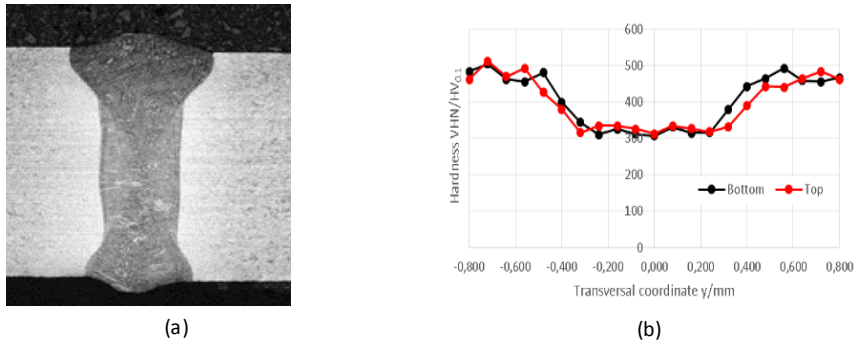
Similar square butt weld in 1.4678 (FORTA H1000): (a) Macro section and (b) hardness plot across the weld zone
